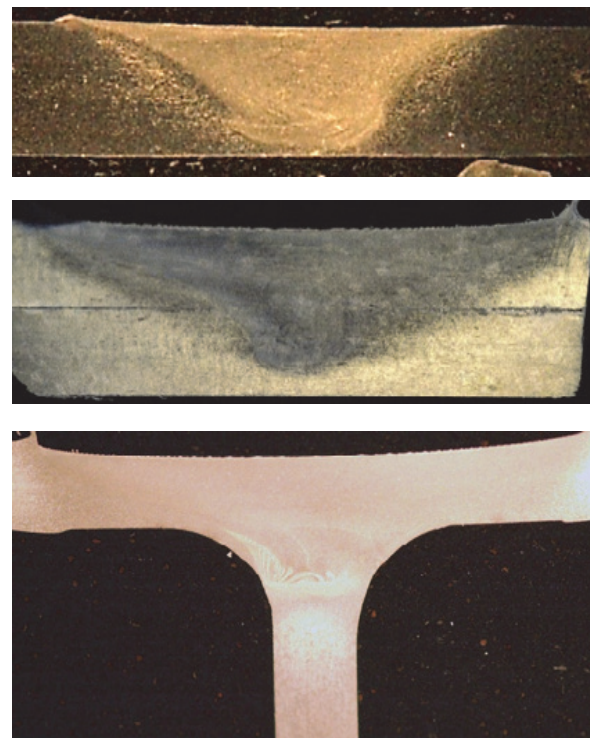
Butt, lap and T joint weld section macrographs (3 mm thick AA6082-T6)
